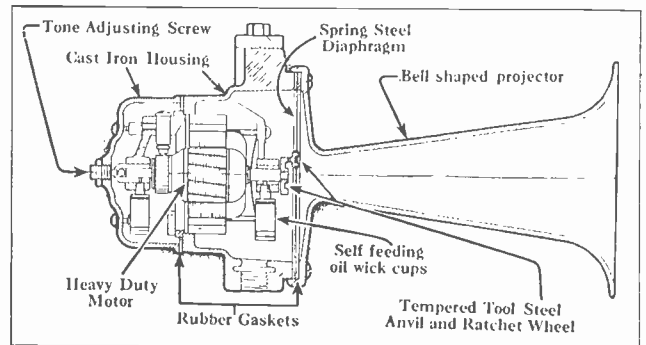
Sectional view showing parts and construction of motor operated horn. (Sketch courtesy of Benjamin Electric Company.)
